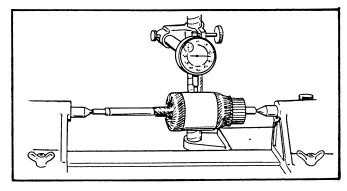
CHECKING ARMATURE SHAFT RUNOUT
